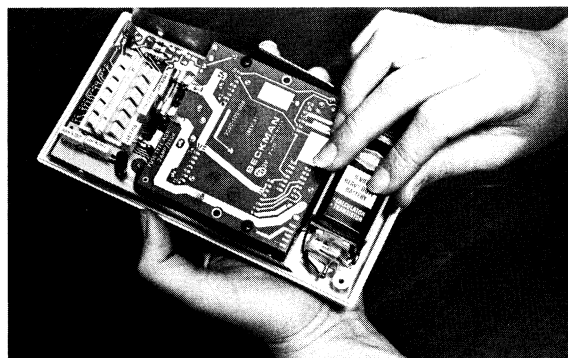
Removal/Replacement and Inspection Procedure — Electronics Assembly (continued)
